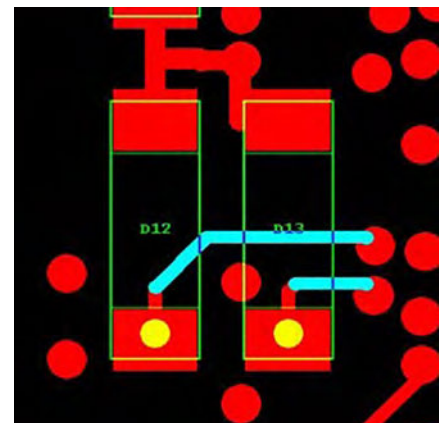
Traces under a no-lead device may cause the component to rock, or teeter-totter, because of the difference in height of solder mask and solder paste as the PCB goes through the reflow oven.
